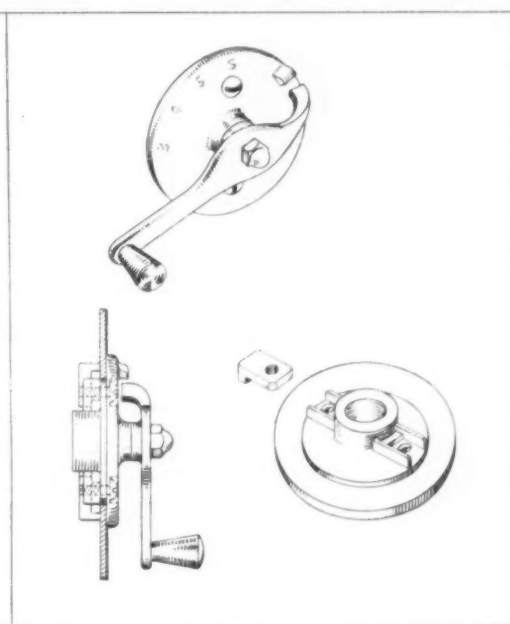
Die-cast Flanged Part with Hub and Boss on Opposite Sides of Flange
